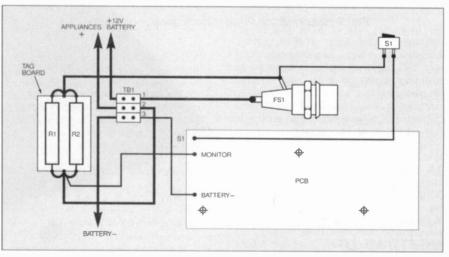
Interwiring details between the printed circuit board and off-board components. Note that heavy-duty 10A wire must be used where indicated by thicker leads.
